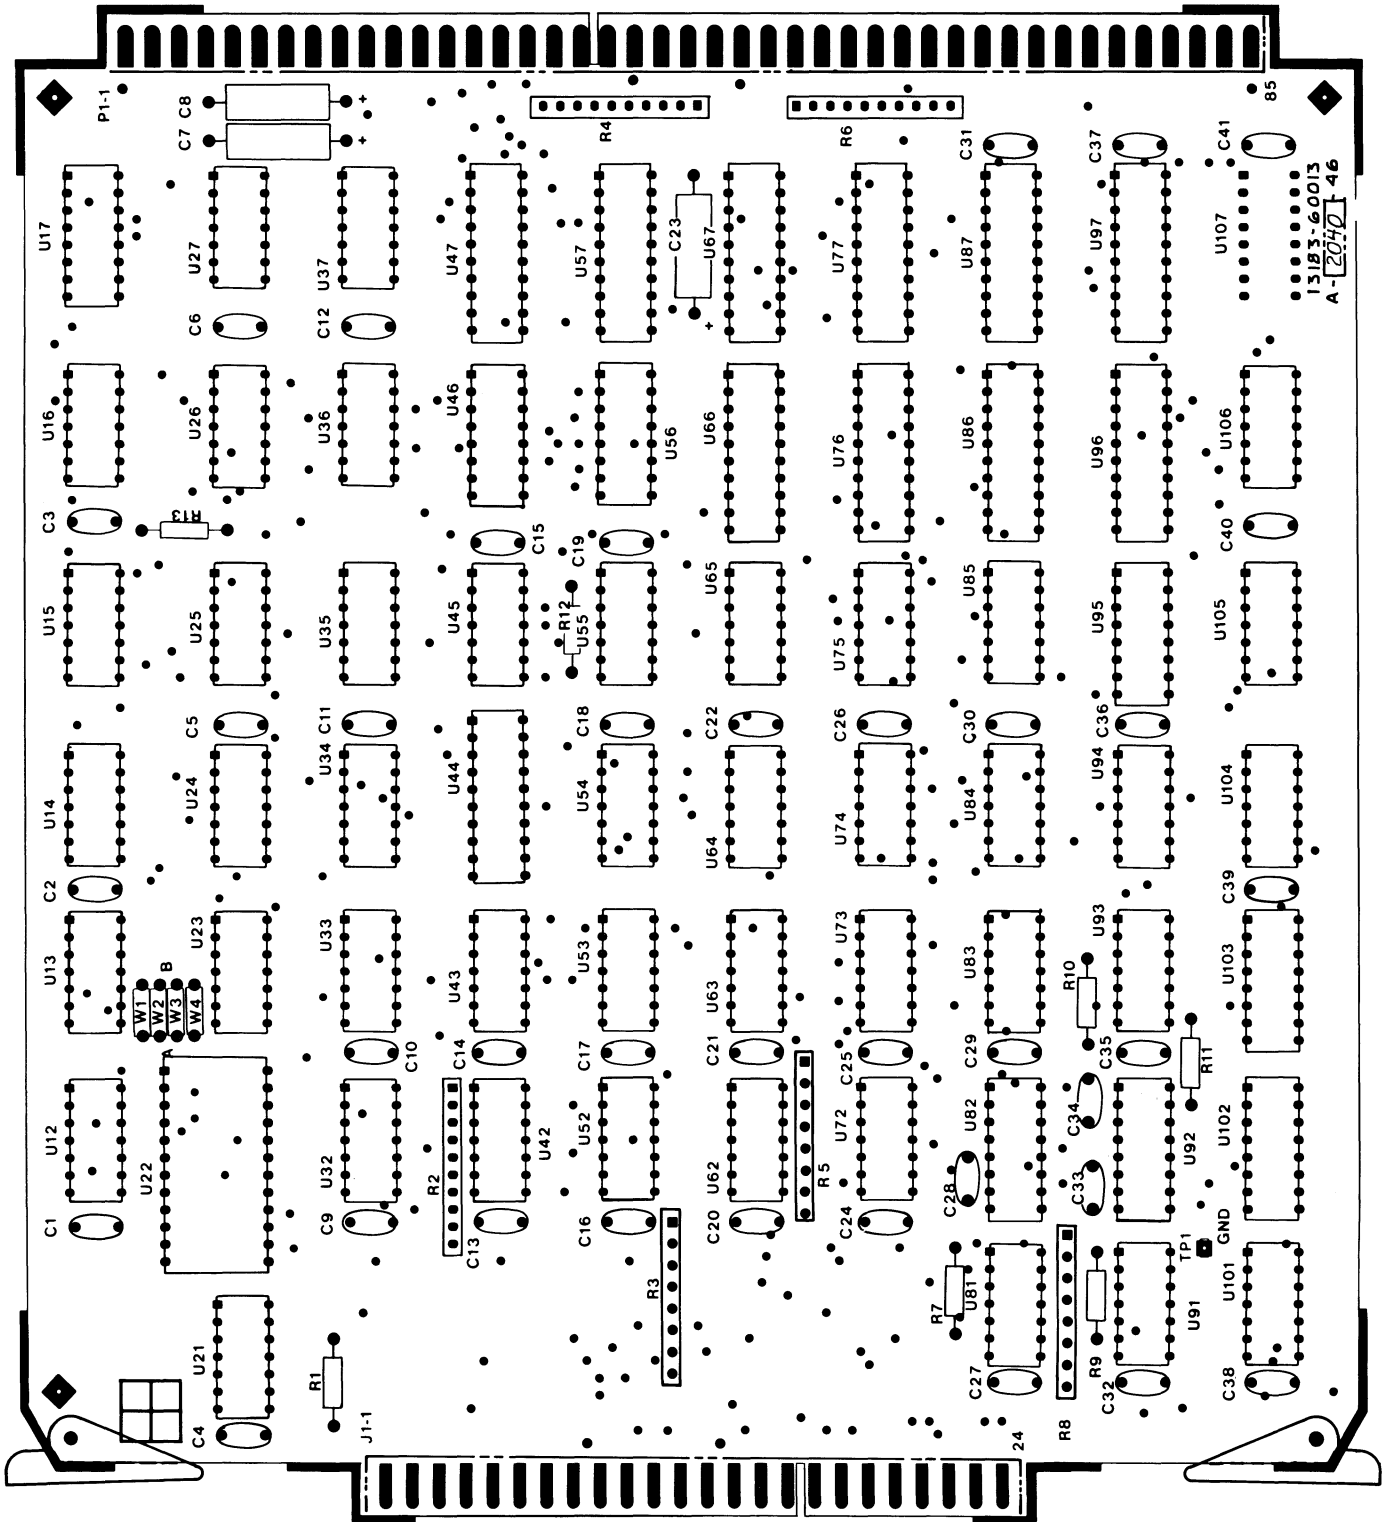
Mag Tape 2 PCA Parts Location Diagram
